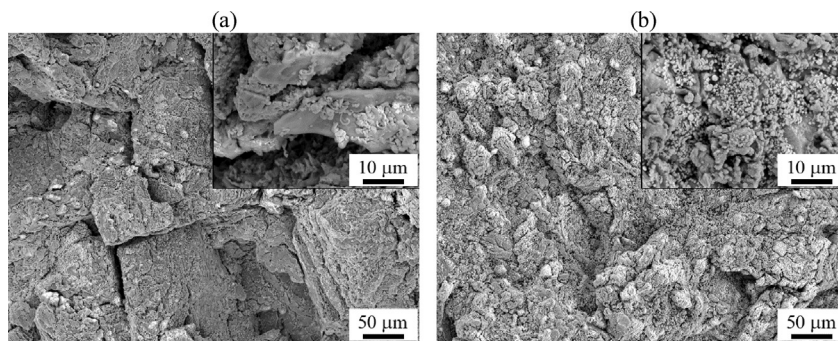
Fracture surface morphology of Pb–19La specimens after compression testing at (a) 20 °C and (b) 500 °C.
